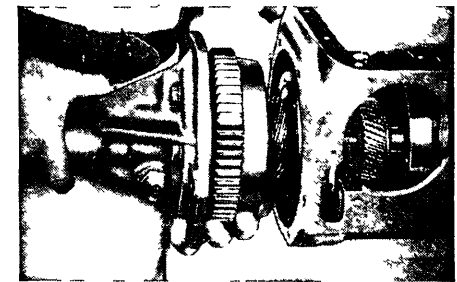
Unfasten rear bearing retainer from transmission and slip out the r verse assembly. Be sure to remove the selective washer which may stick to the mainshaft r remain in the counterbore of the output shaft. Remove mainshaft through rear of transmission, and the bronze washer from the rear clutch hub
